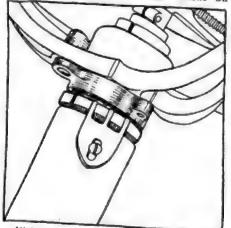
RAMBLER STEERING GEAR ADJI STMENT
